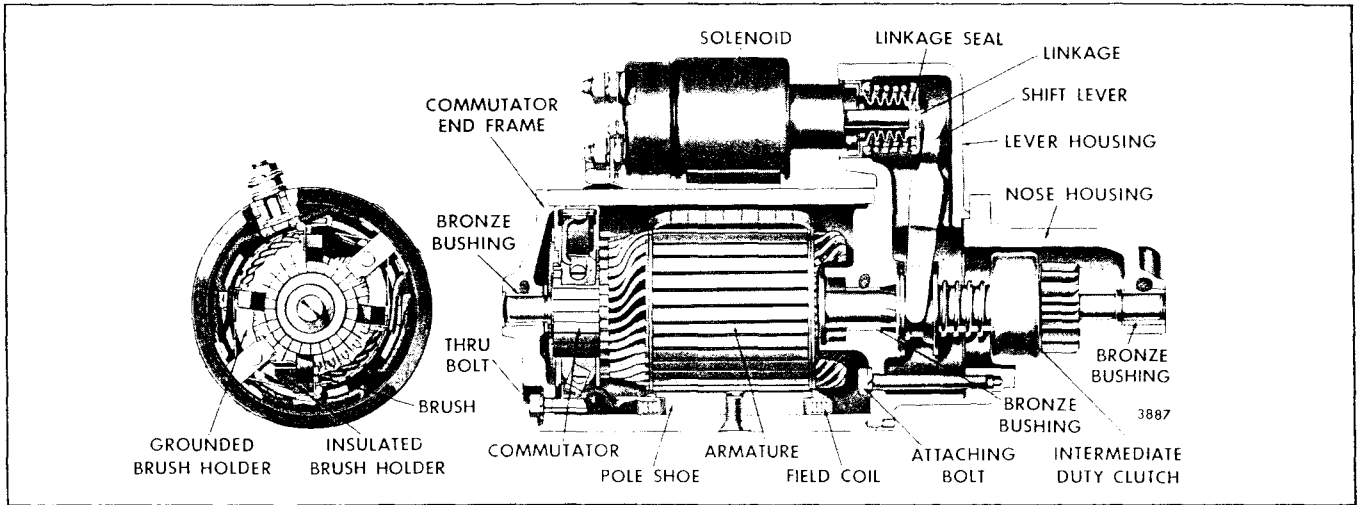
Cross-sectional View of Motor with Sprag Intermediate Duty Clutch
